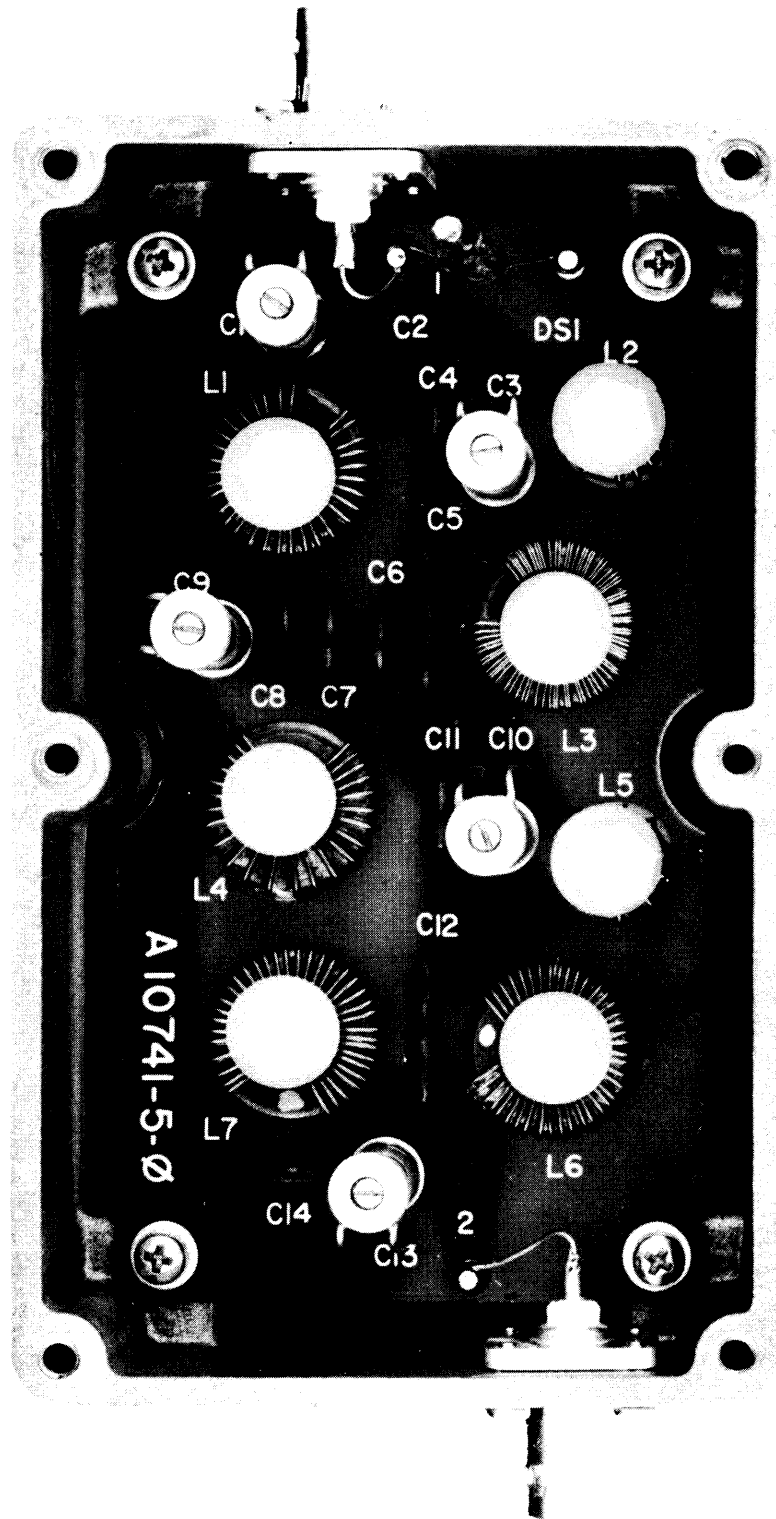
BANDPASS FILTER (FX10018-1) ASSEMBLY 1A2 COVER REMOVED
